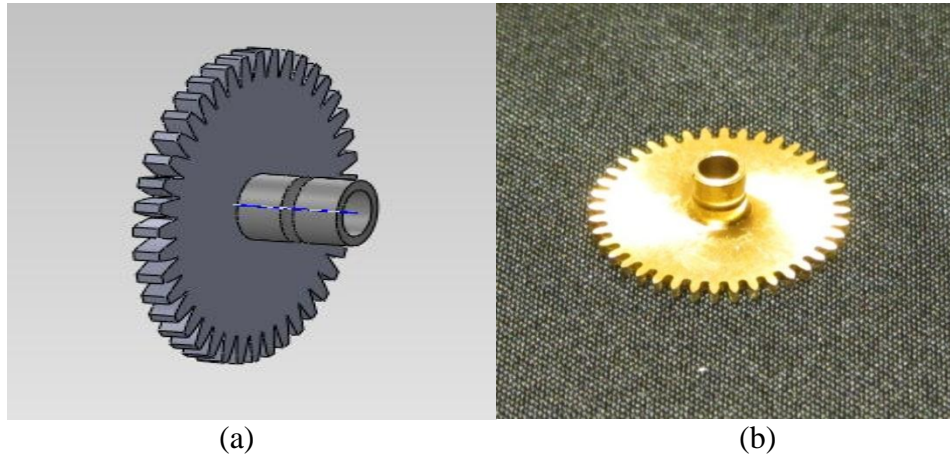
Hour wheel, W_{43} , with canon of the gear train with (a) Solidworks view, and (b) photograph
